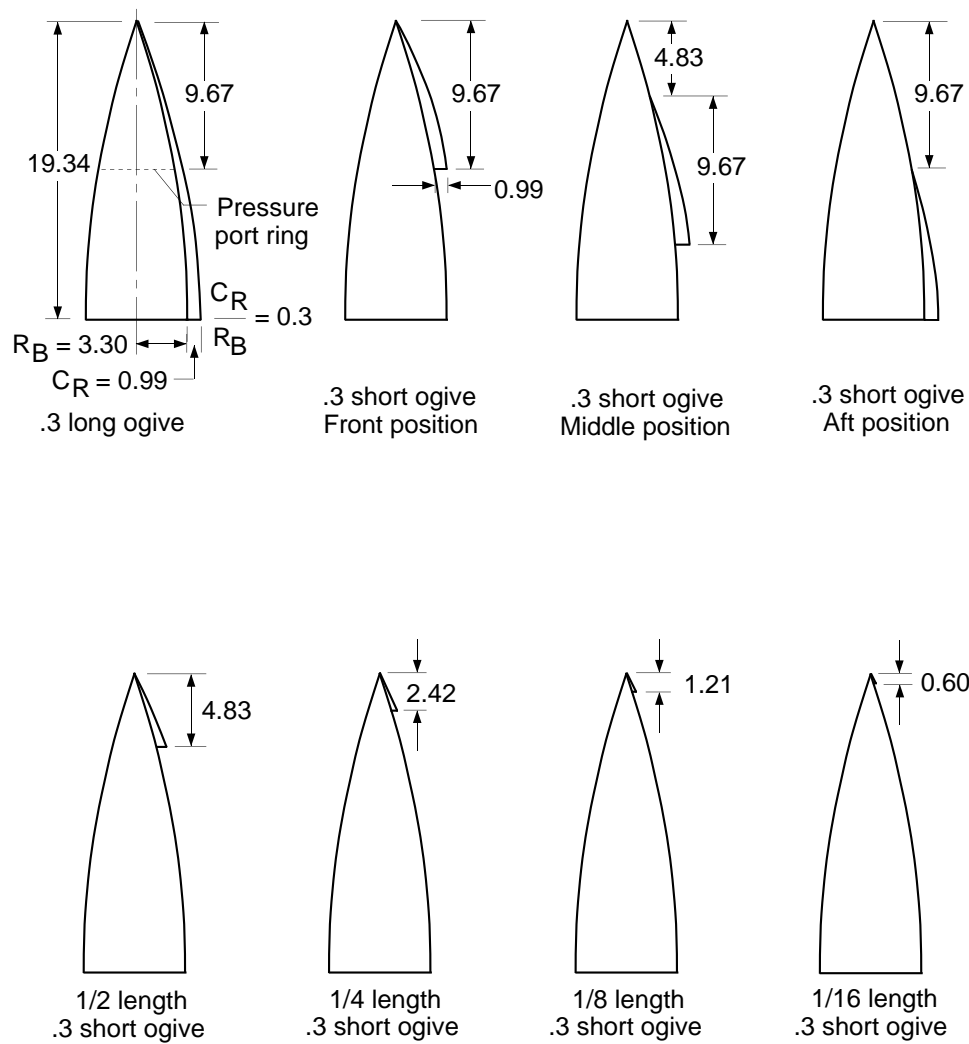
Ogival strake shapes shown at locations tested. Linear dimensions in inches.
